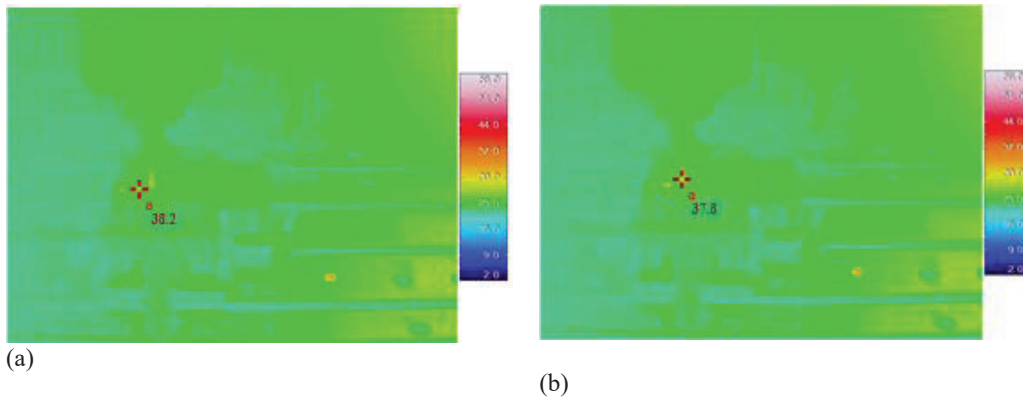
Generated cutting temperature of the drilled hole and drill bit (non-coated carbide) interface arrangement through IT thermal imager camera of (a) after second drilled holes (b) before drilling the third holes (cutting speed of 20 m/min, feed rate of 0.2 mm/rev and drill size of 6 mm)
